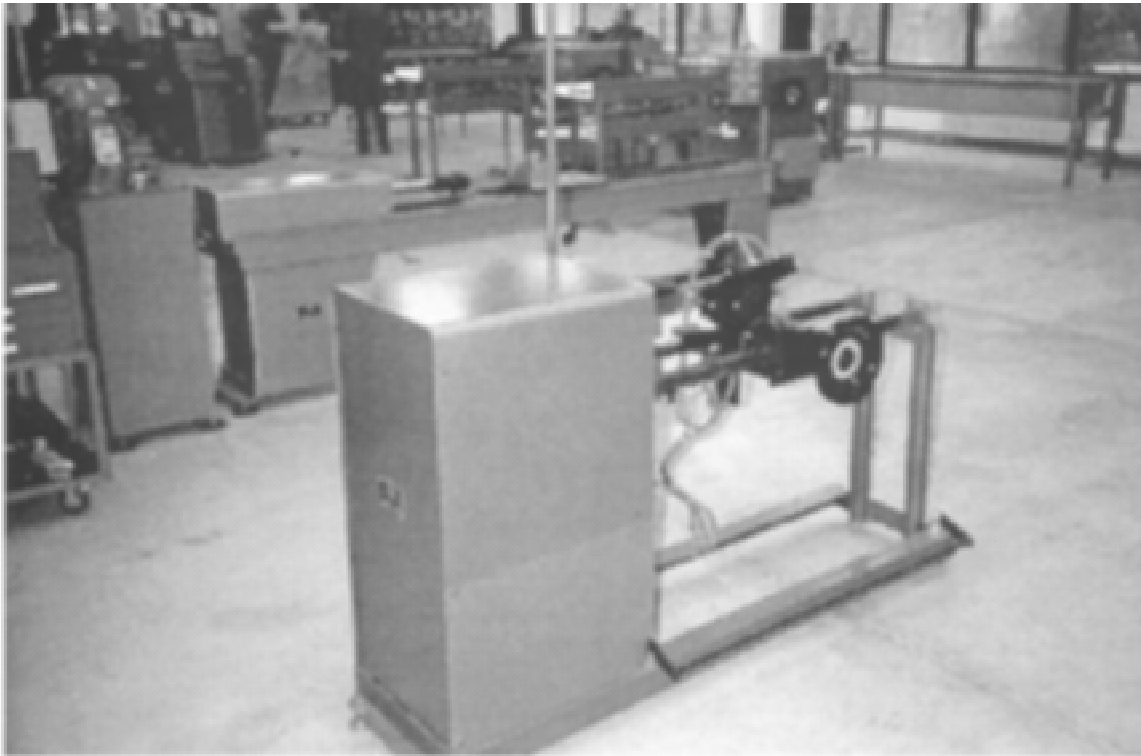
Pneumatic Mandrel Extractor, Courtesy of Century Design, Inc.
